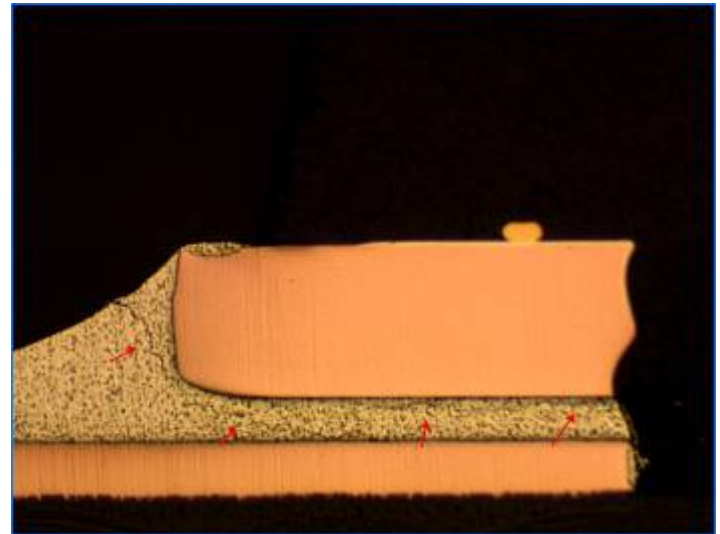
cross section, SN67, U54, left lead solder crack, 100x
